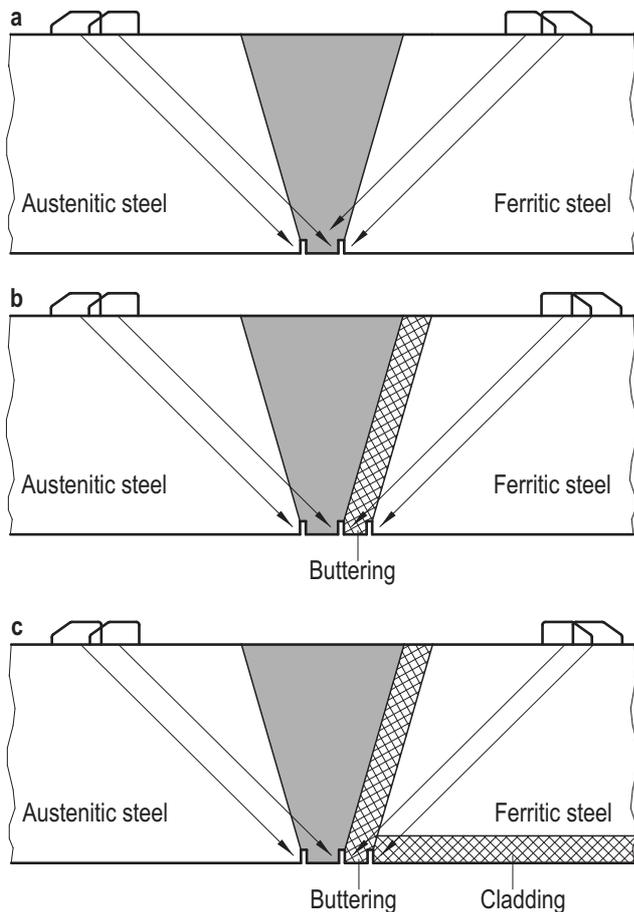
Location of notches and beam angles for the test for longitudinal defects of welded joints between ferritic and austenitic steels
